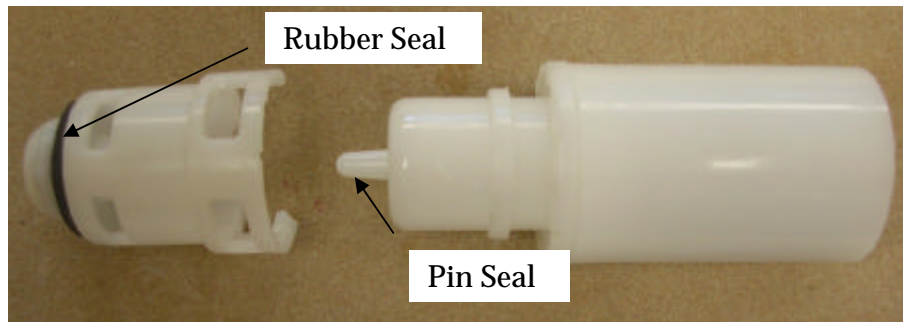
Chrysler Cirrus fuel vapour port – plunger assembly detail.
